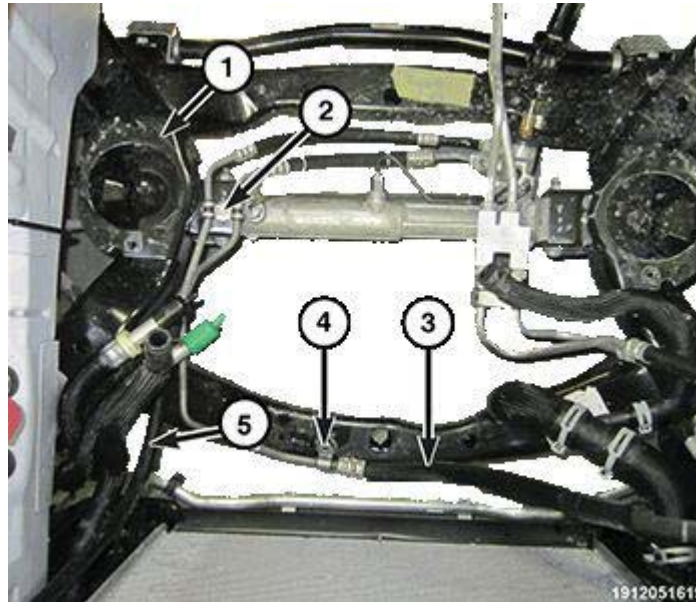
Engine Cradle, Fasteners, Pressure Hose & Return Hose
